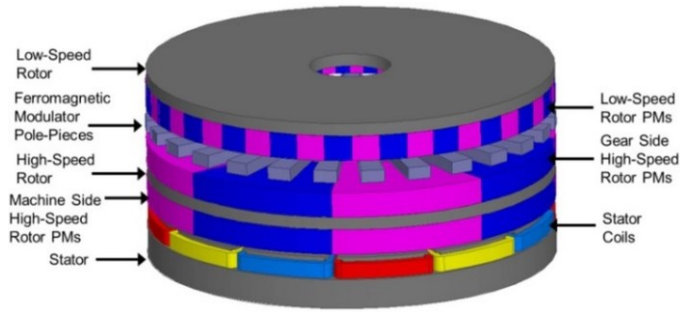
Series Connected Axial Flux Magnetically Geared Machine
